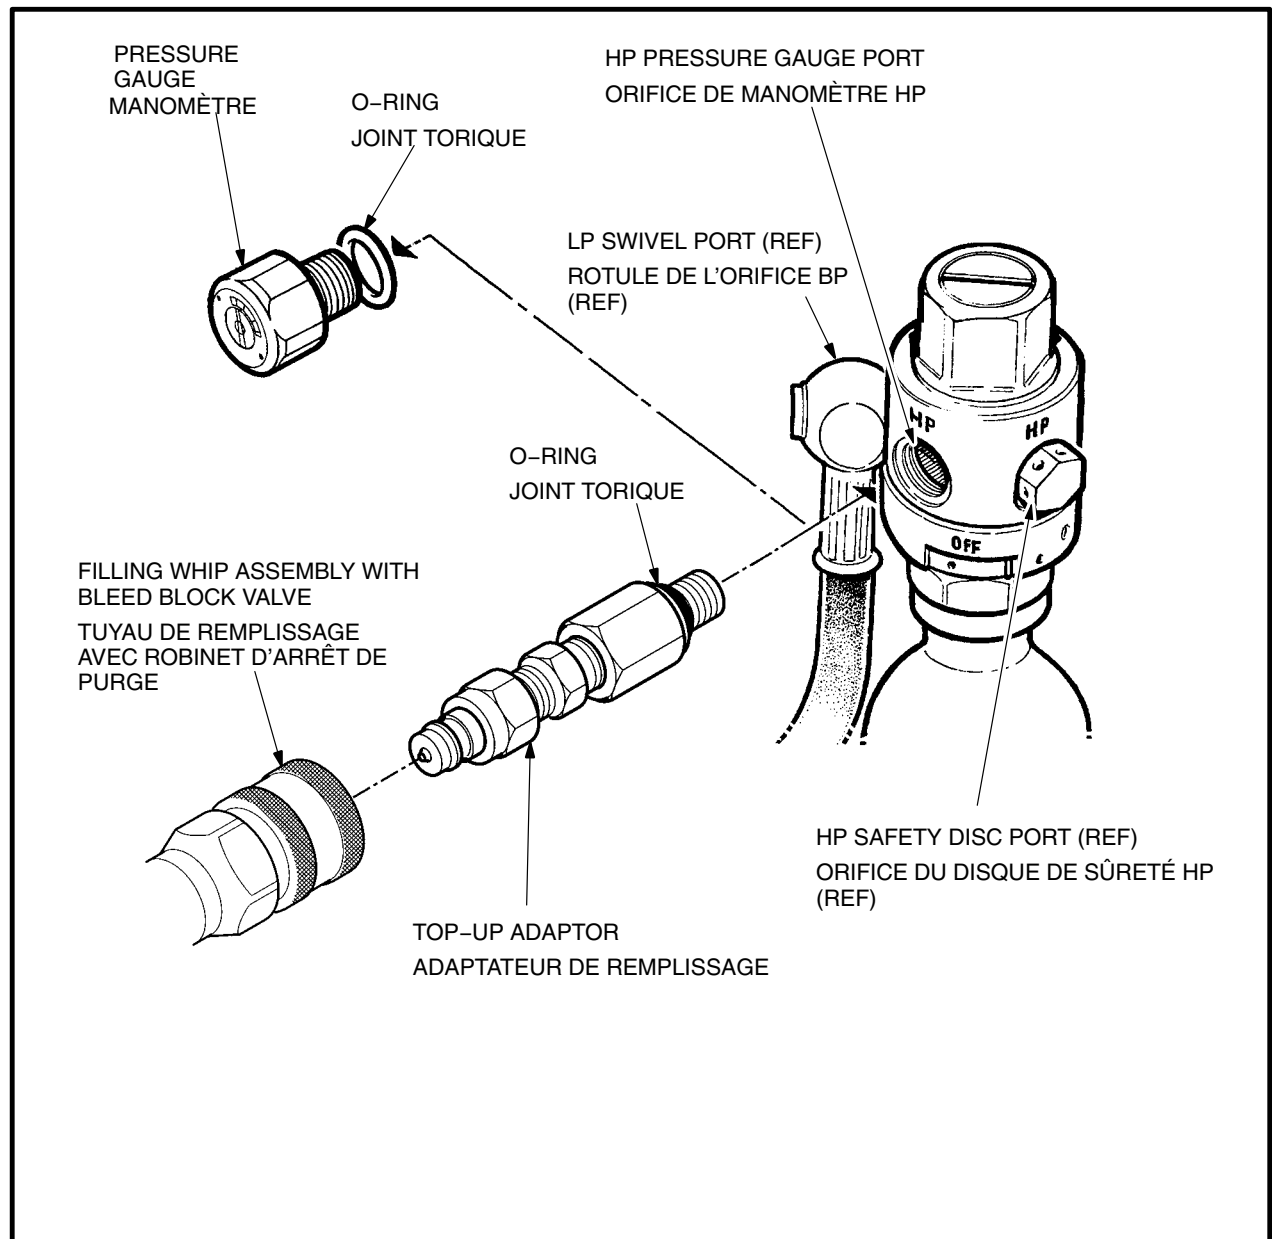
A Pressure Gauge Removal and Top-up Adaptor Installation
